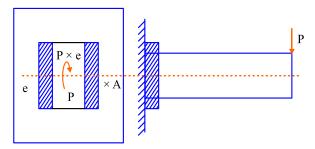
Eccentric loaded weld joint – Type II
